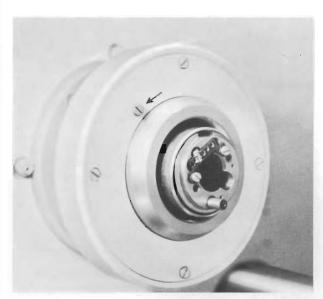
Left-hand Thrust Bearing of Scanning Drum Support and Transparency Illumination Arm with Attachment Removed
